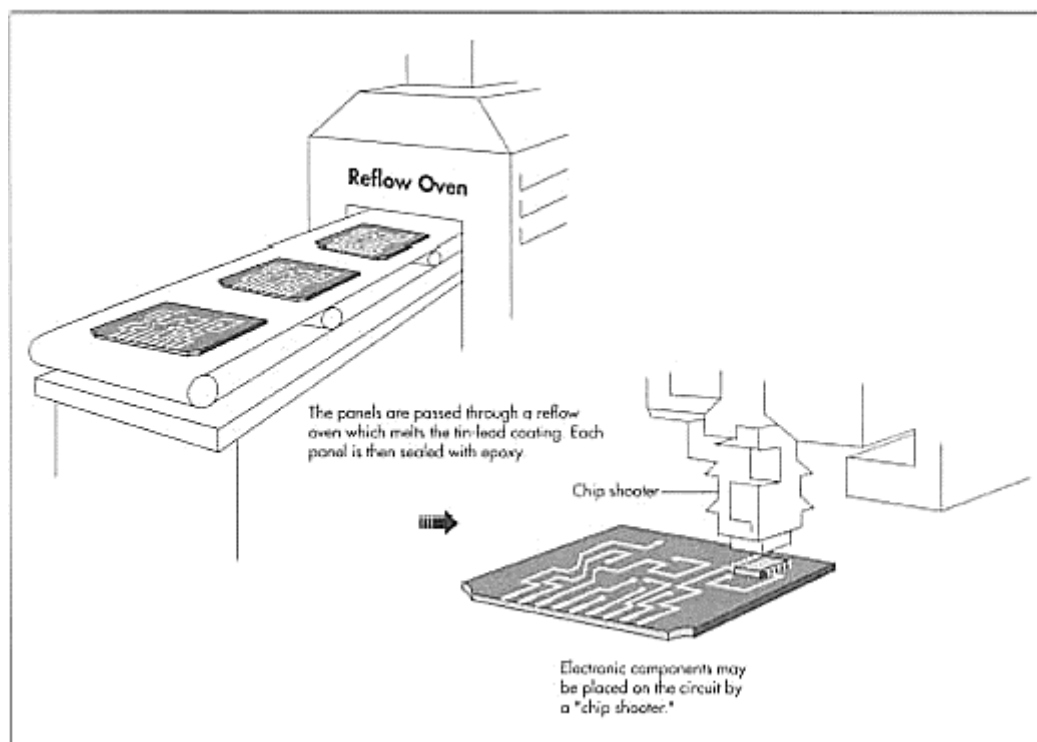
Addition of electrical components to the PCB, during PCB production.
